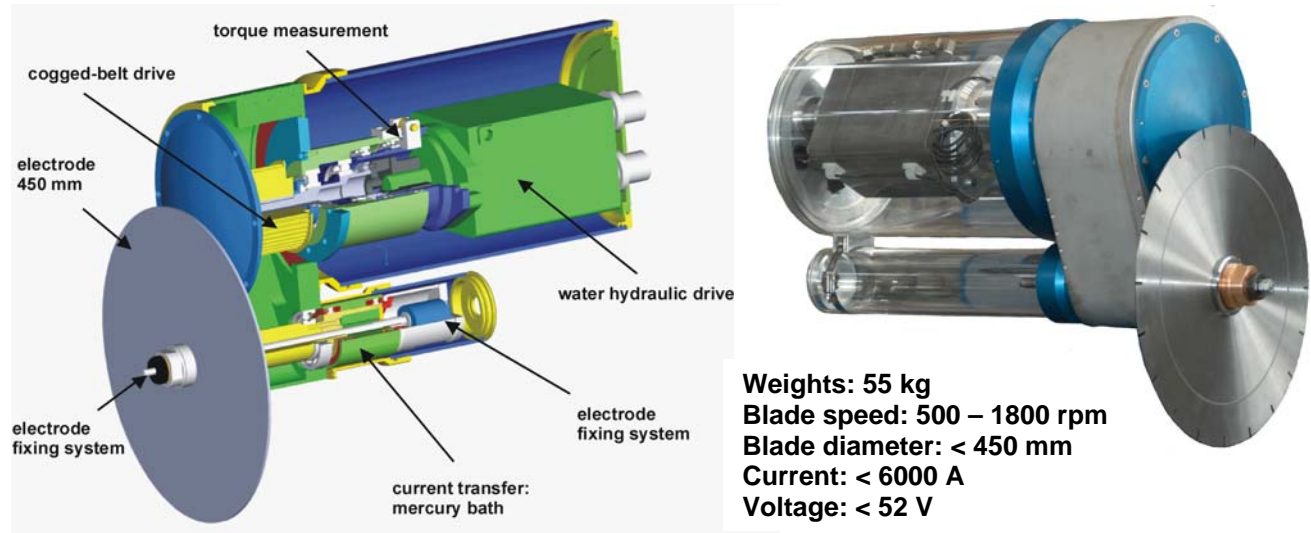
Design engineering (left) and cutting tool (right) for CAMG
